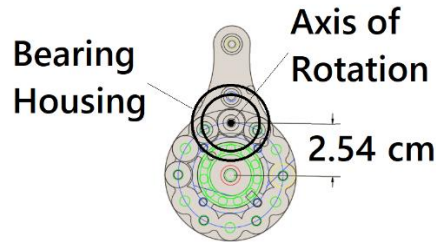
Enhanced CAD drawing for the crank portion demonstrating the axis of rotation for cylinder A along with the crank length for cylinder A. This image does not include the crank adapter portion.
